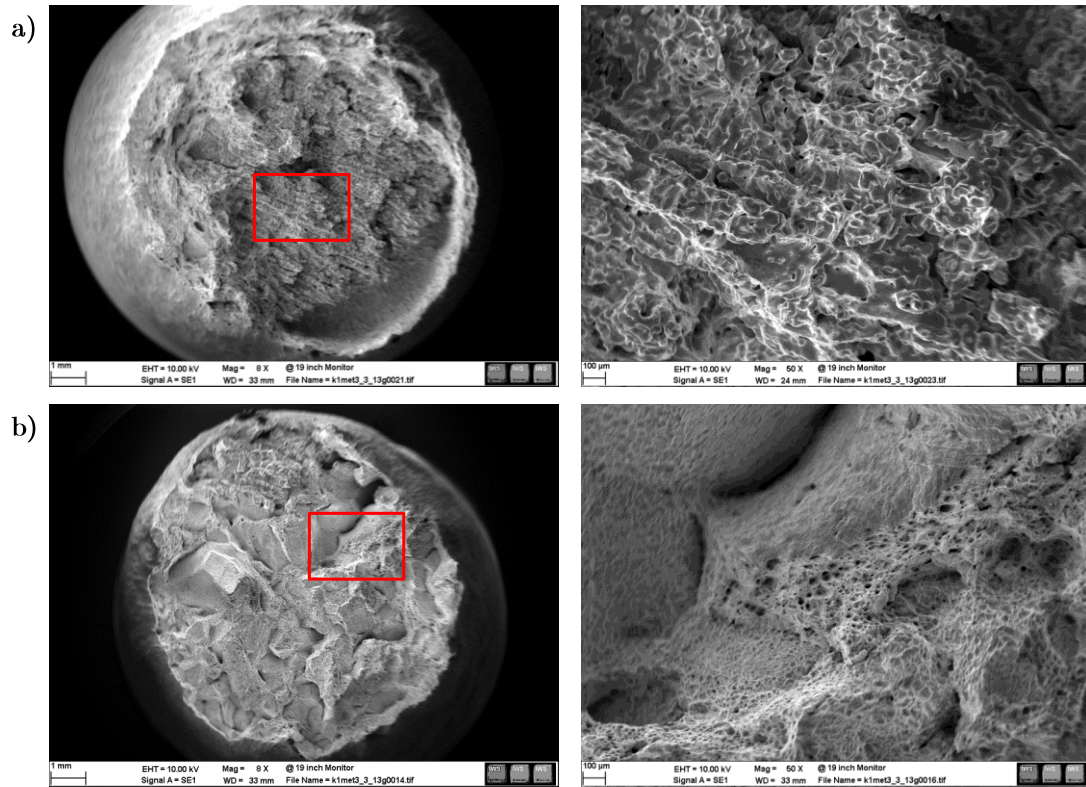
Fracture surface (SEM) of specimen tested at a) 650°C (RA=49%) and b) 700°C (RA=51%).
